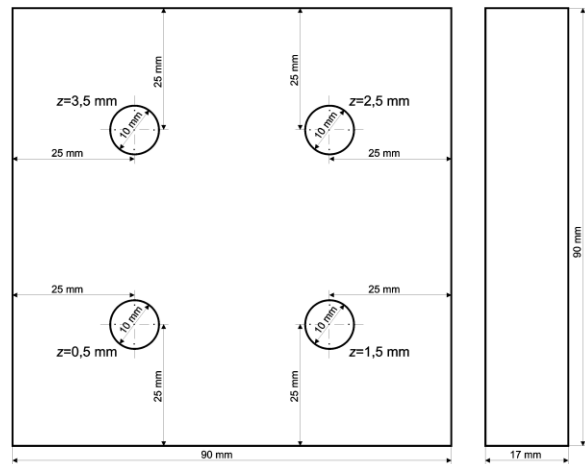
Sample dimensions and location of holes simulating material defects [10].
